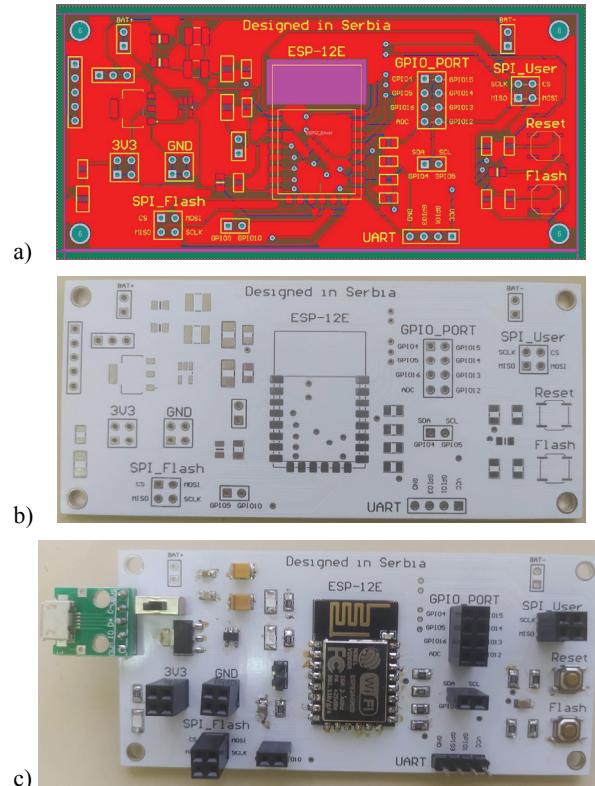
Designed PCB with MCU with Wi-Fi module: a) design and placement of components in a software tool; b) manufactured PCB; c) PCB with soldered parts, ready for use.
